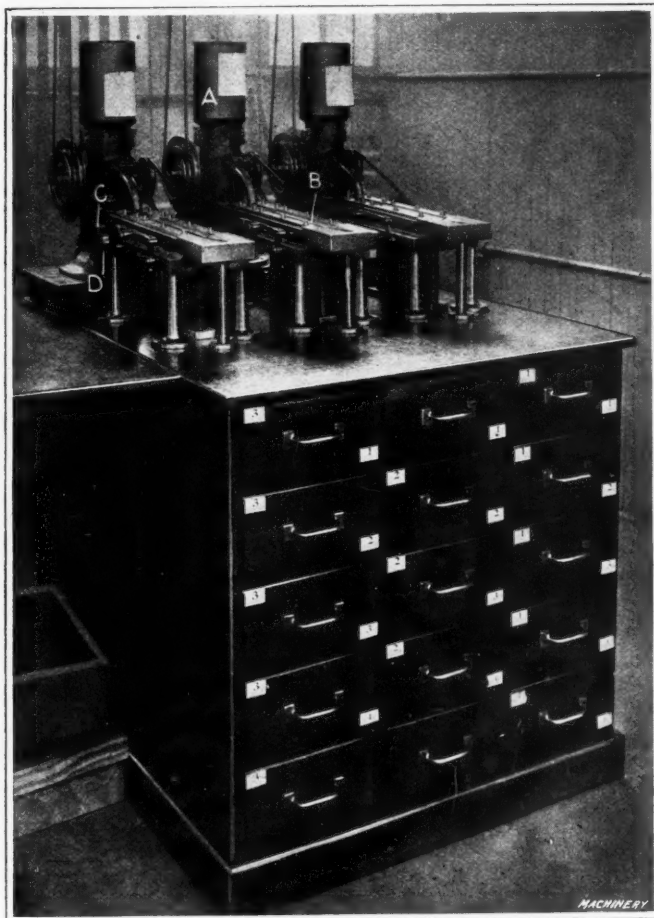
Close View of Battery of Automatic Gaging Machines with Horizontal Blades
